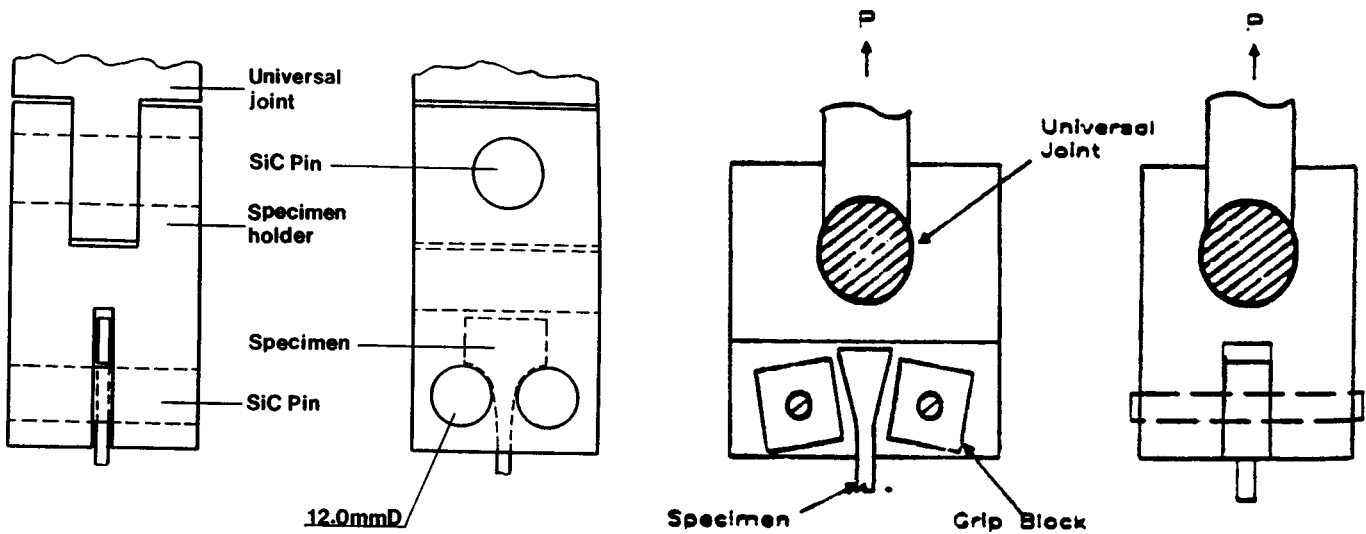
Examples of Shoulder-Loaded, Passive Gripping Systems for Flat Specimens (5,6)
